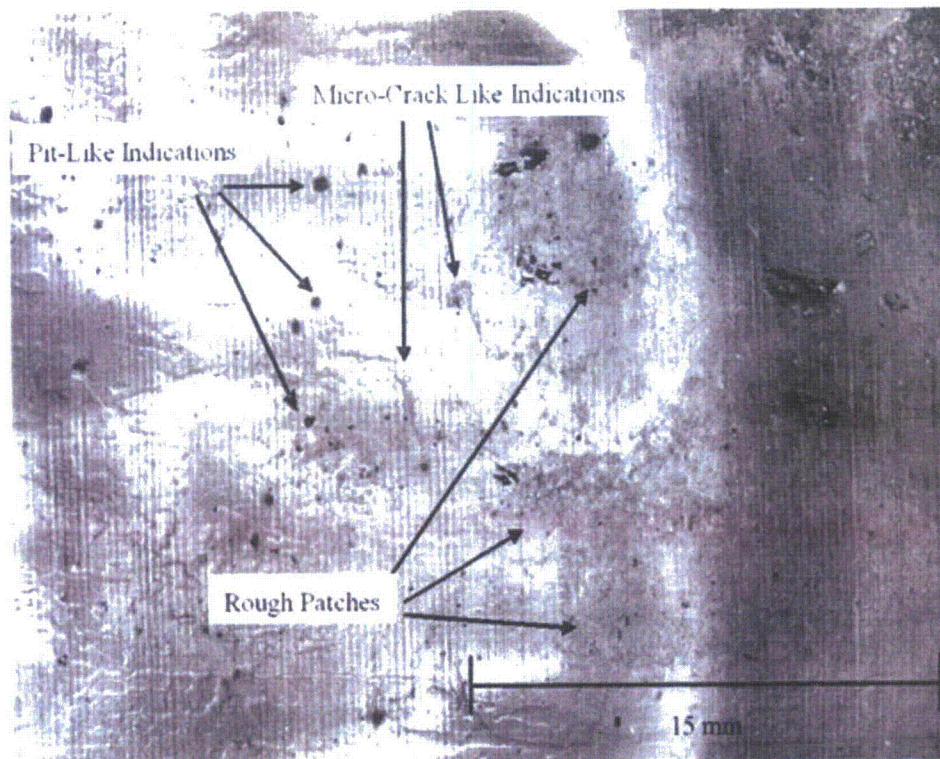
Rough Section and Possible Micro-Cracks in the Penetration Tube Interior
